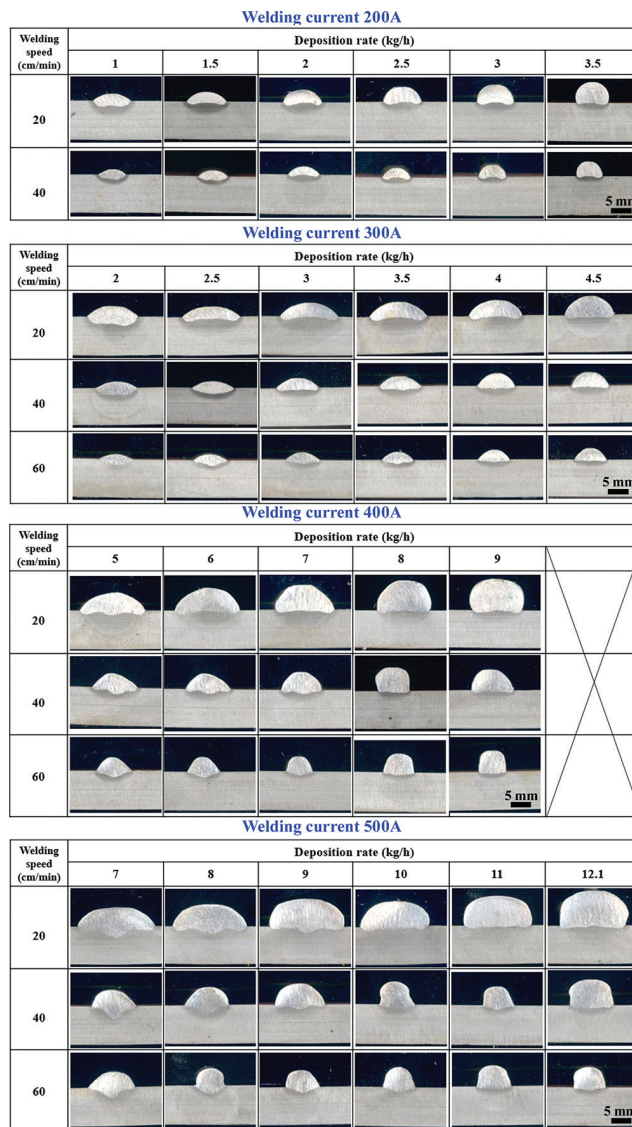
Macrosection of the weld beads at welding currents of 200~500 A.
